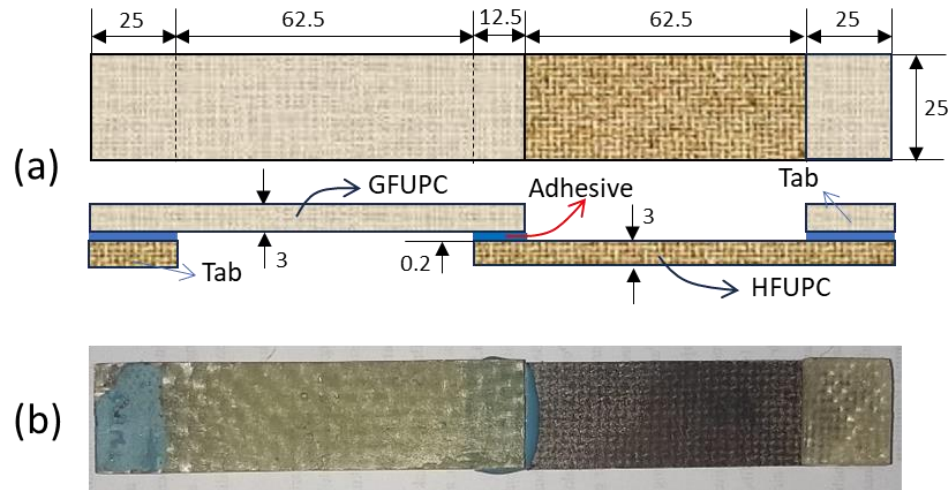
(a) The dimension of single lap joint (not to scale), (b) The photograph of the specimen. Unit is in mm.
